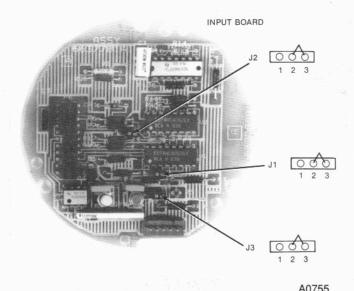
Jumper Wire Locations and Positions on Input Board.
